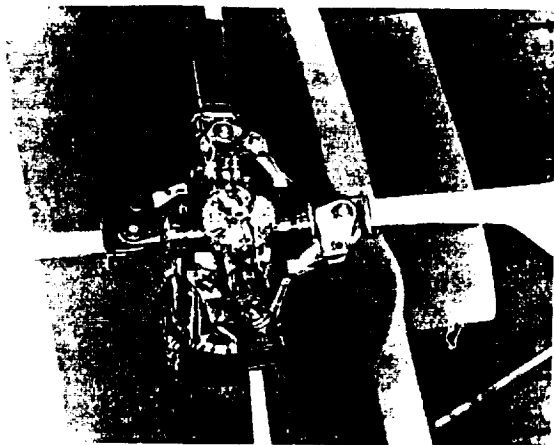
BO-105 HINGELESS ROTOR HUB.
